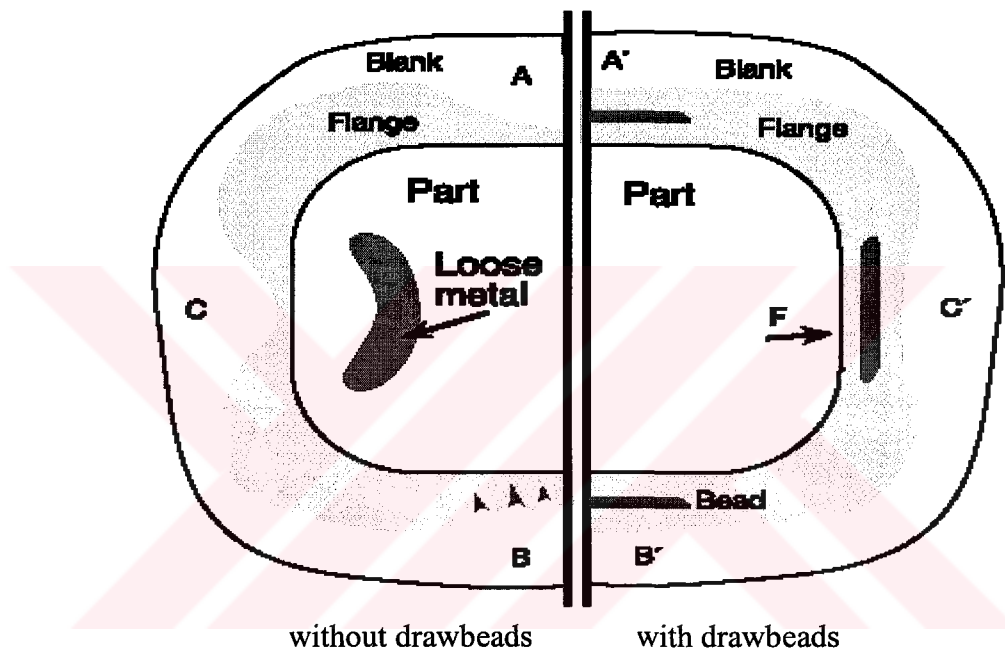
Plan View of a Rectangular Box Formed From a Developed Blank
